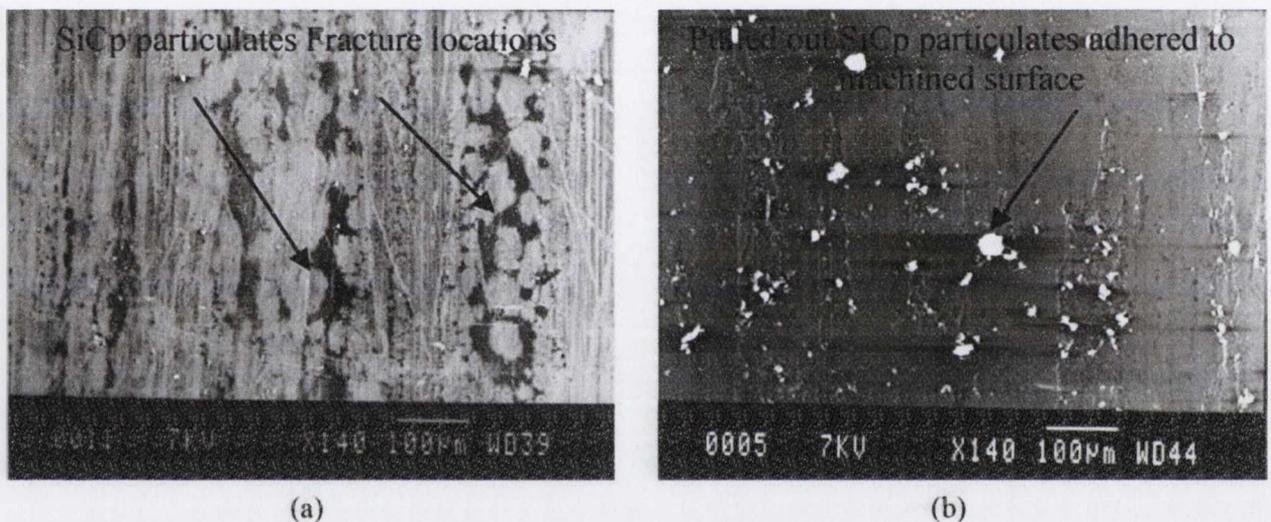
SEM pictures of machined surface on Al/SiC/20p/220 showing evidence of (a) SiCp fracture and (b) SiCp pull-out [175].
